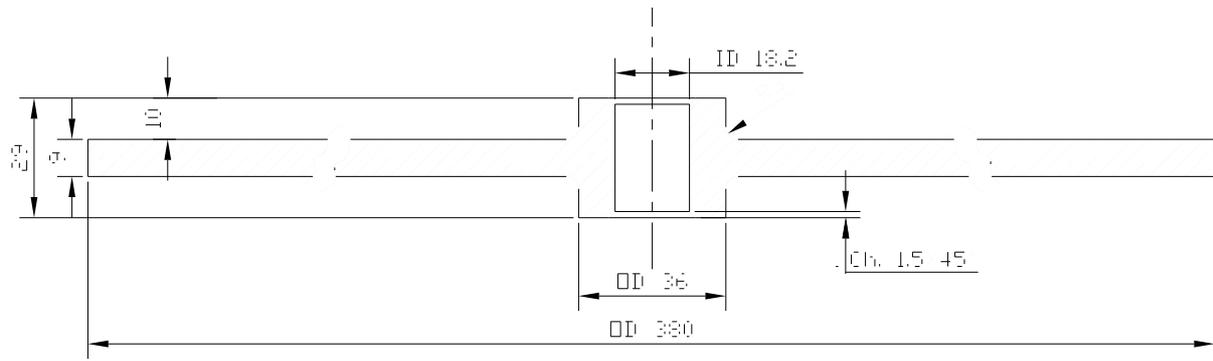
Geometrical details of ORNL plate (All dimensions in mm)
